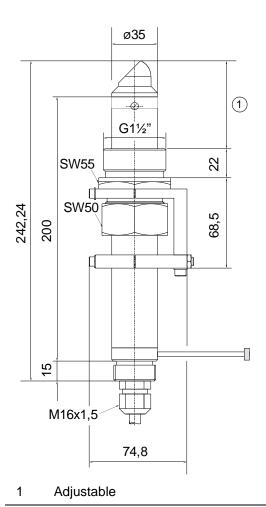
Dimensioned drawing pipe sensor Type NIS-V200RT
